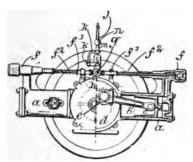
Serpollet system. Sectional side elevation of engine.
